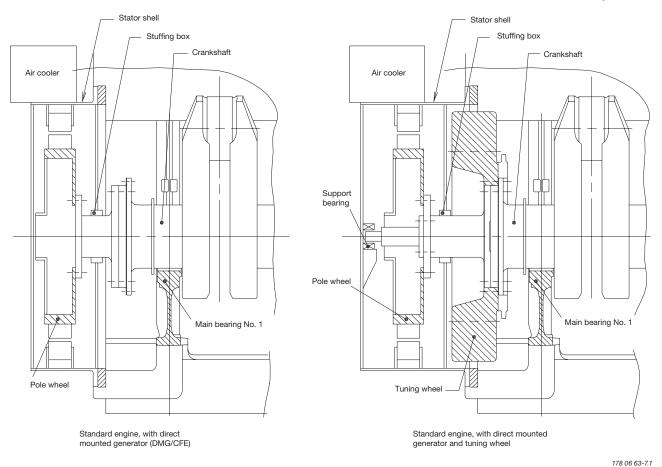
Standard engine, with direct mounted generator and tuning wheel
